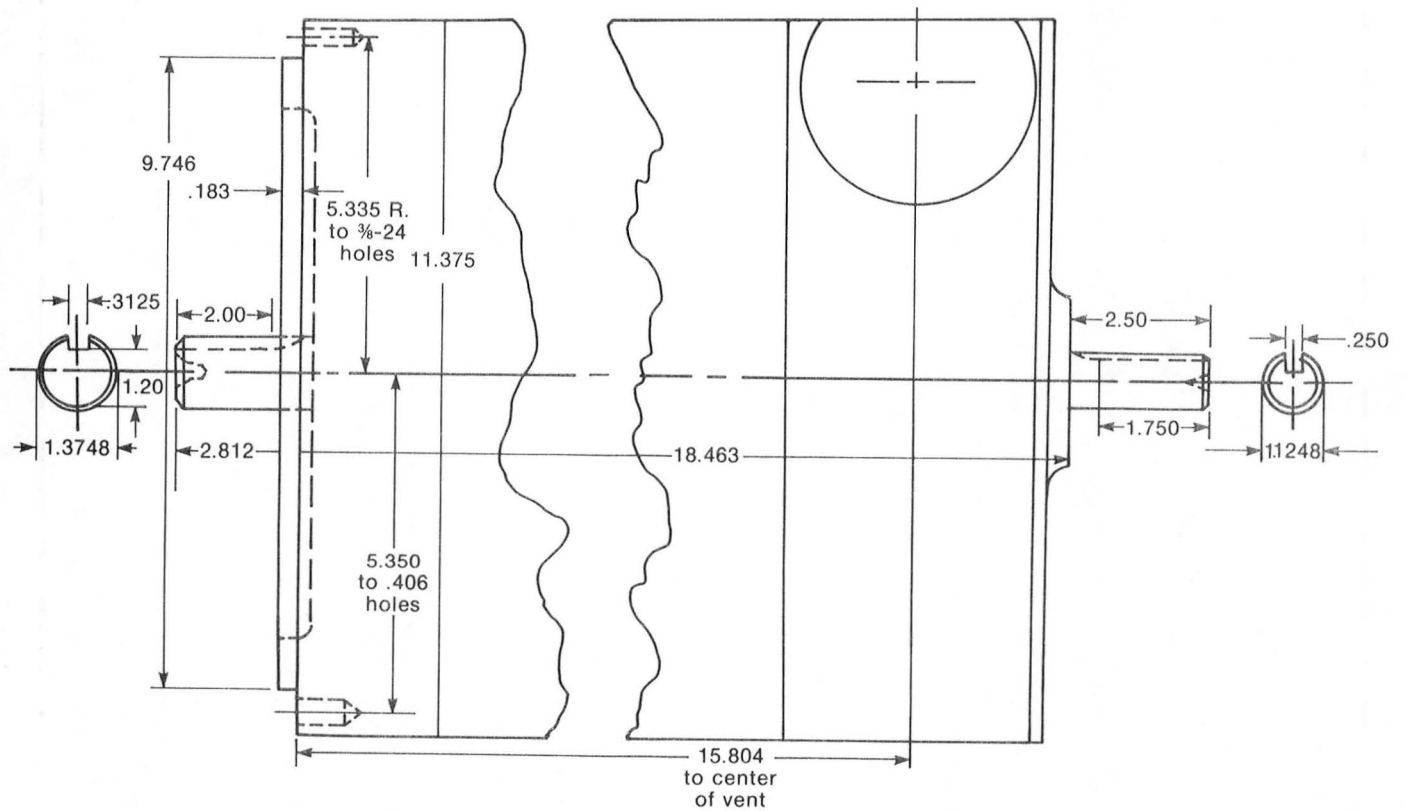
Outline Drawing of General Electric 5BT2366C10 Motor
